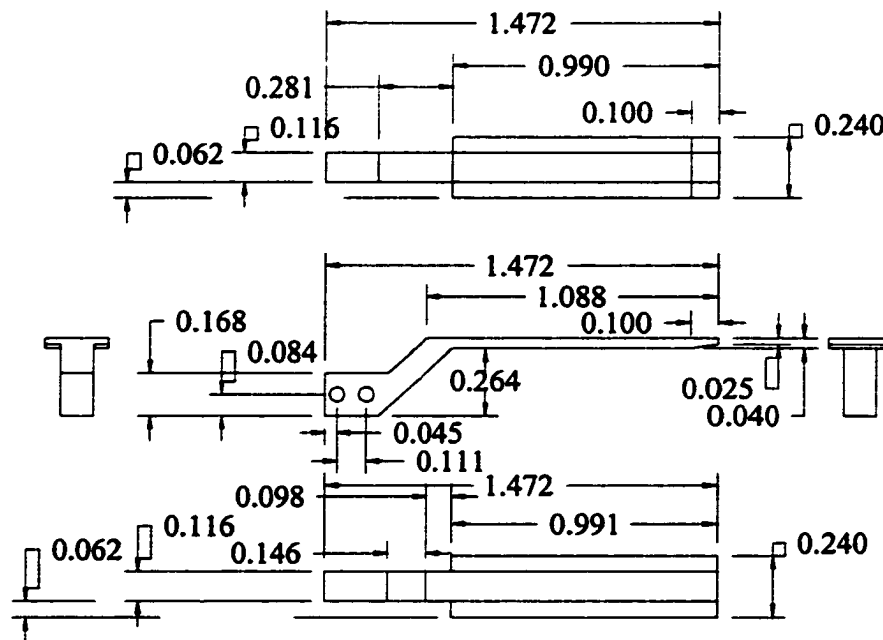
Design drawing for the lower pinscher of the stainless steel wobble stick pinscher mechanism.
